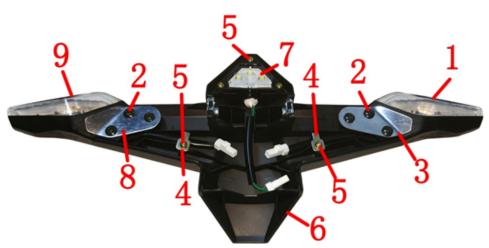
RI	EAR COVER	Rear turning light parts for after sales service	CHK	401
